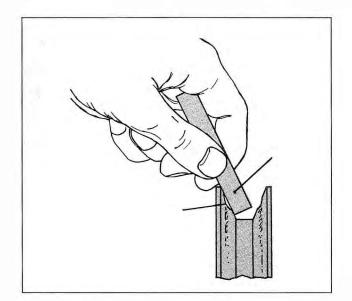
V-belt pulley being checked for wear using a straight edge. A worn pulley may be the cause of a noisy belt, especially if the belt is new.
